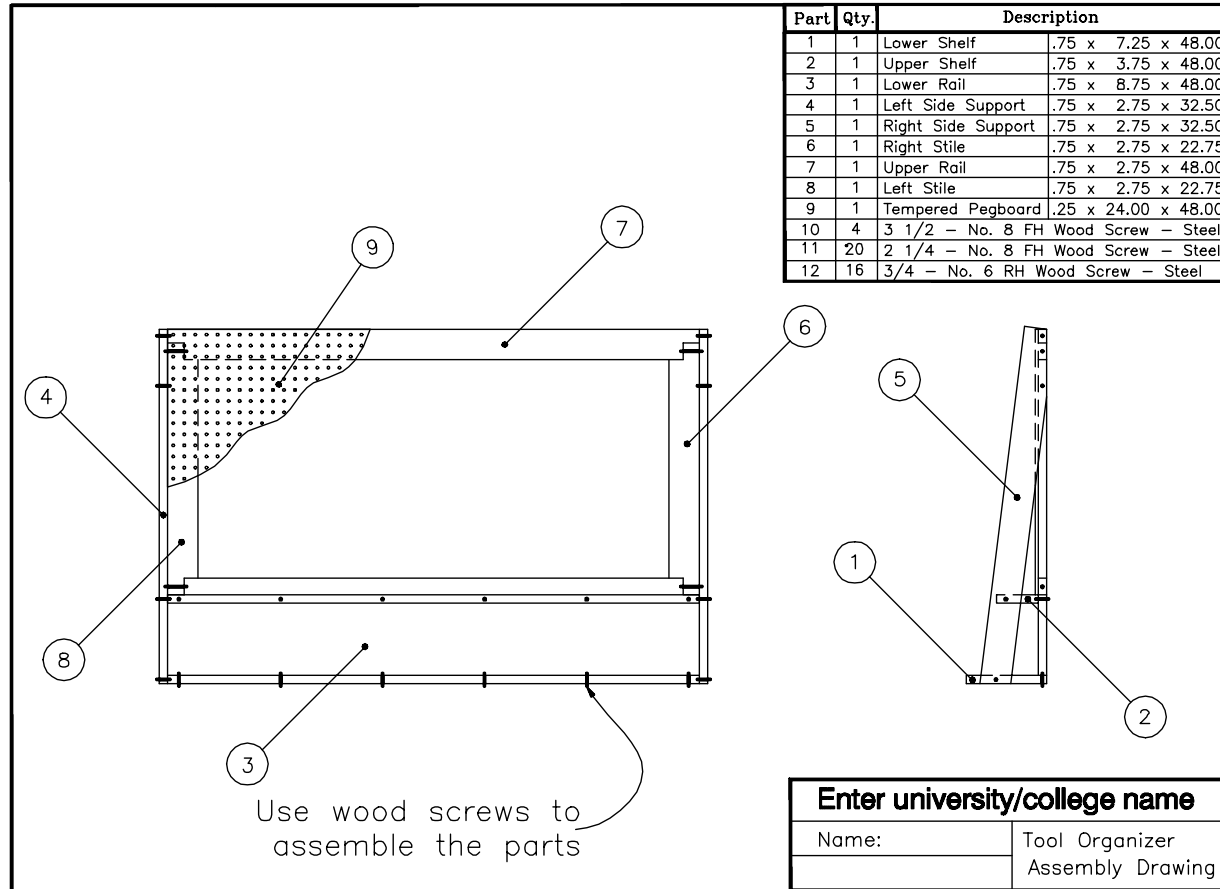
Assembly drawing and BOM of the Tool Organizer
